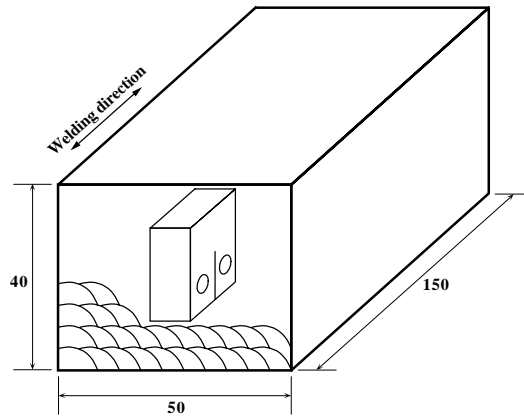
Machining orientations of CT specimens from deposited metal model of TIG welding by Alloy 82
